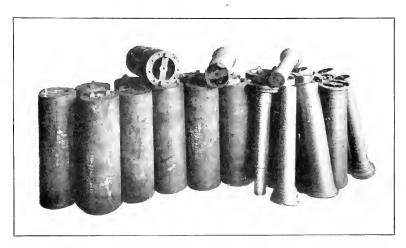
Cast-Iron Test Pieces used in Tests with High-Speed Tool Steels
